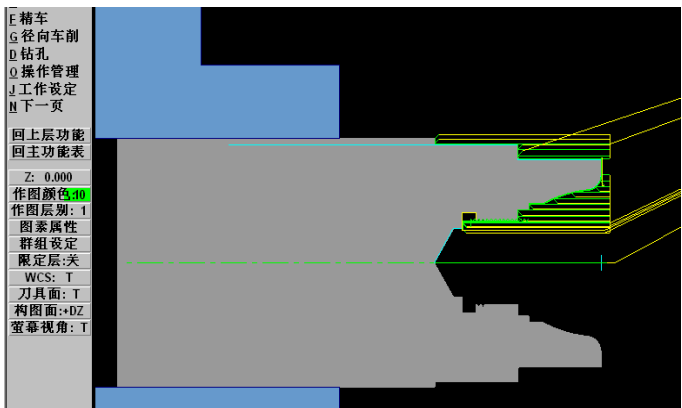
The path simulation drawing of The left part of the cutting tool in part 1
